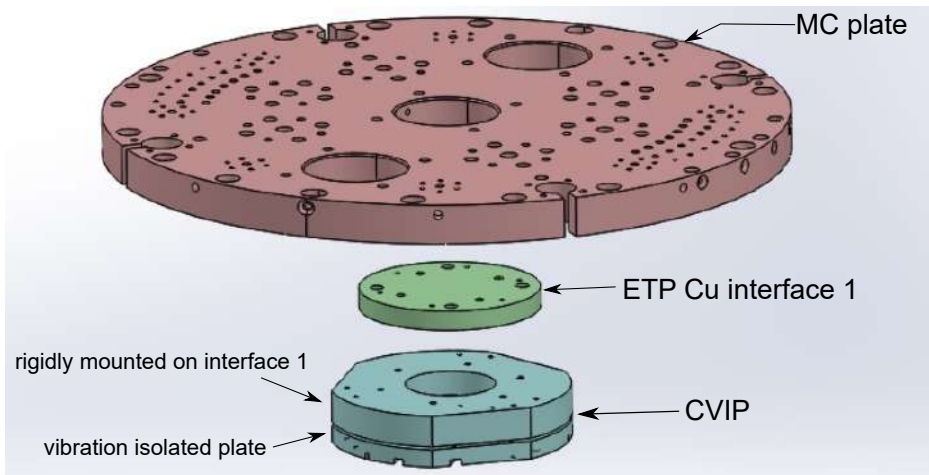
Exploded view of the assembly of the cryo-vibration isolation platform in CFDR-1200.
